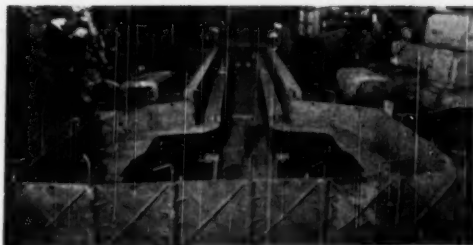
CASTING MAIN GIRDERS OF A WELL WAGON
